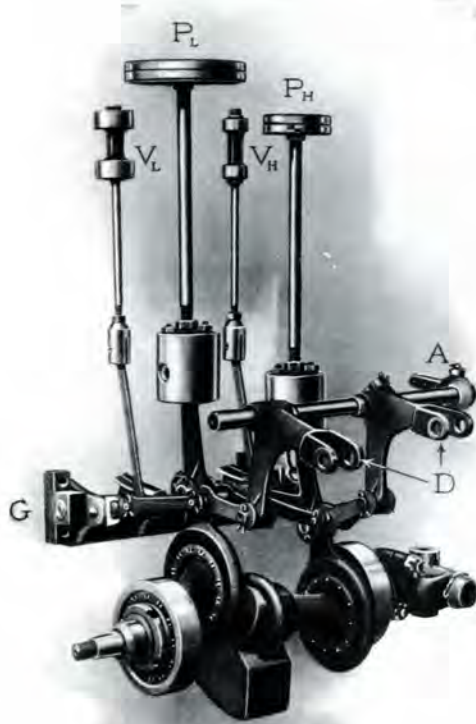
THE WORKING PARTS OF THE WHITE STEAM ENGINE
